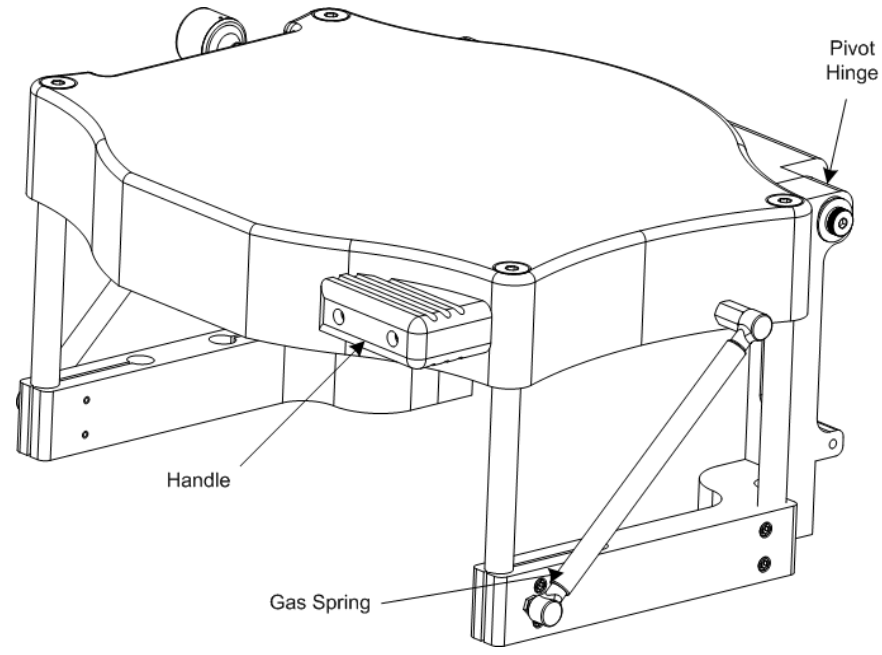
Apogee™ Upper Chamber Assembly (Front)
